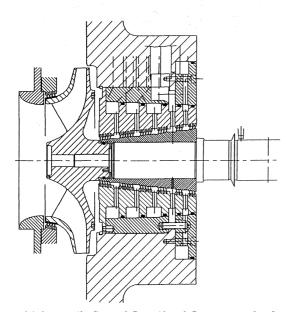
Integrally Geared Centrifugal Compressor for Oxygen Impeller and Shaft Seal.
